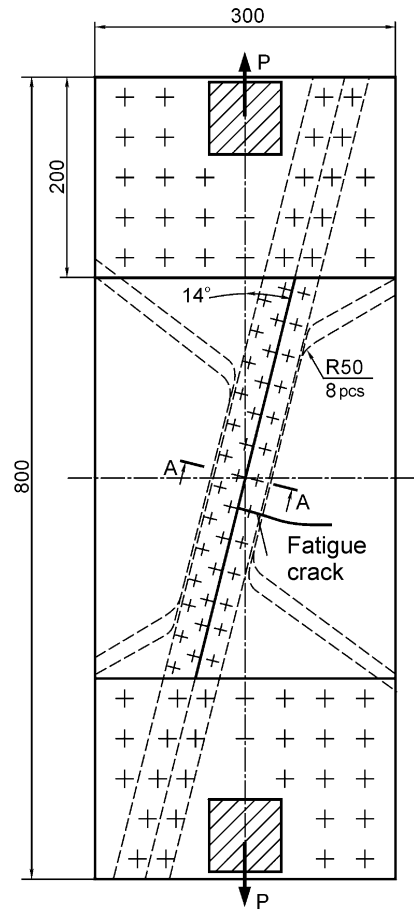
Detachable Wing Panel Longitudinal Loaded Joint Test Piece and Fatigue Cracks Spreading Nature
